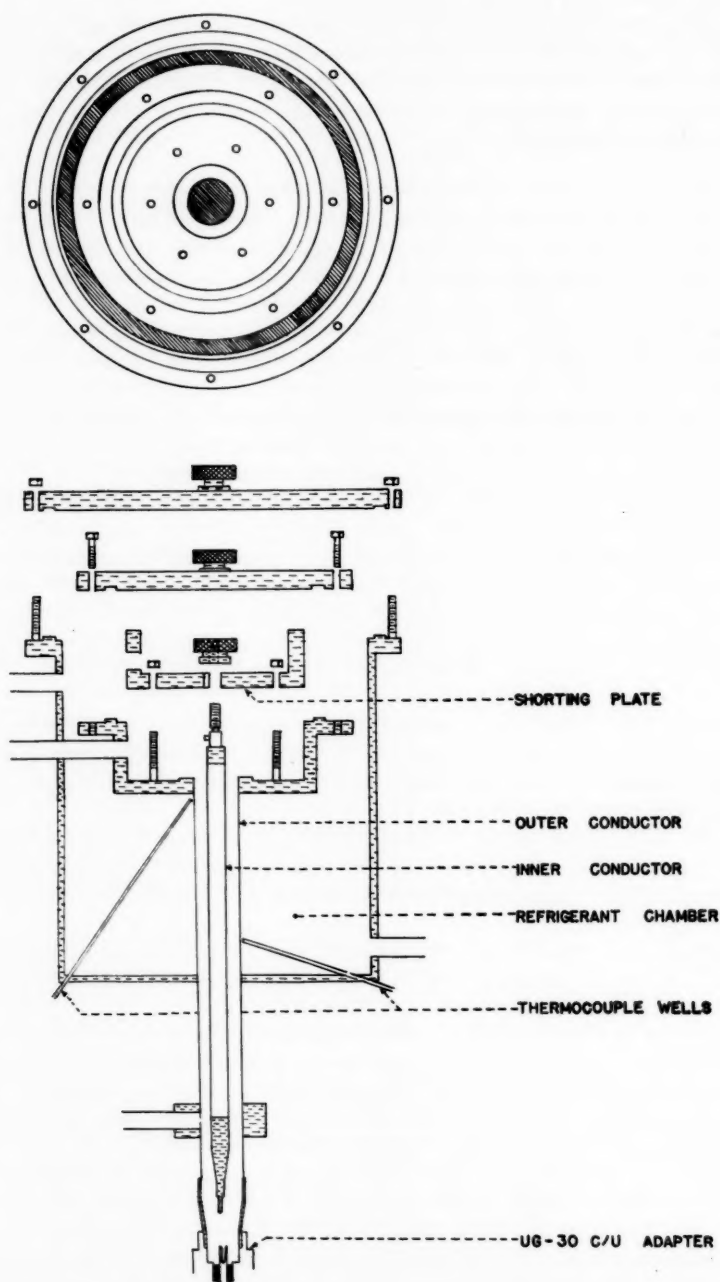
Side cross-sectional and end views of coaxial cell assembly.
